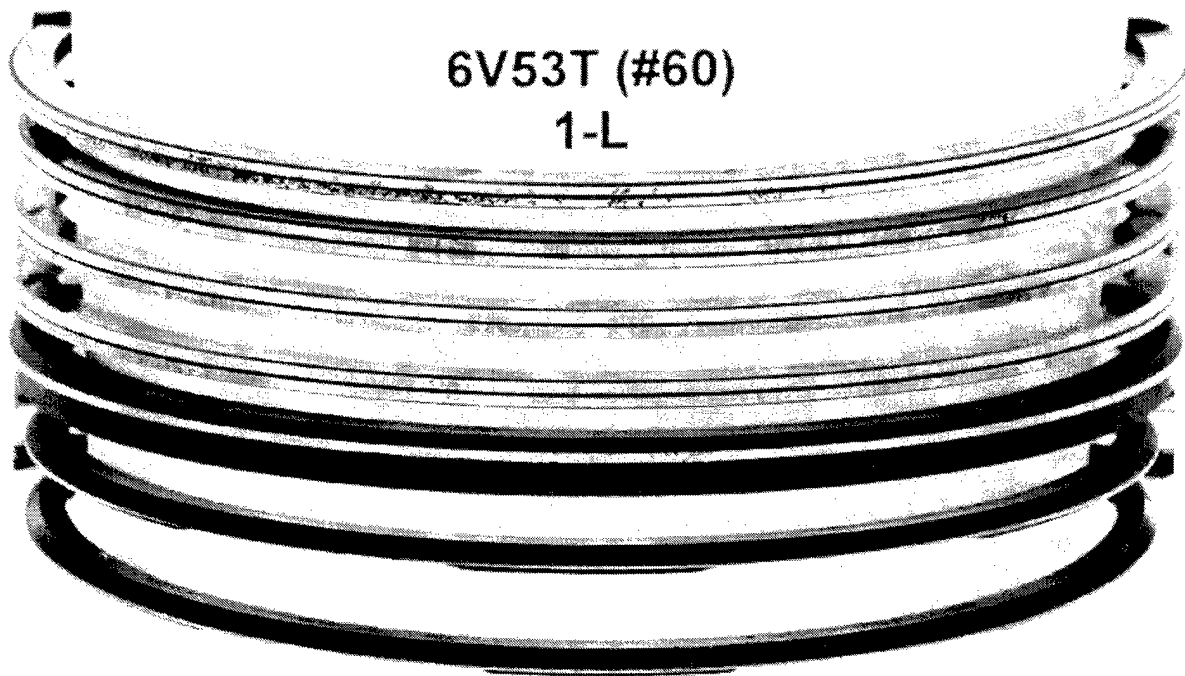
6V53T Test 60, Cylinder 1-L, Rings
